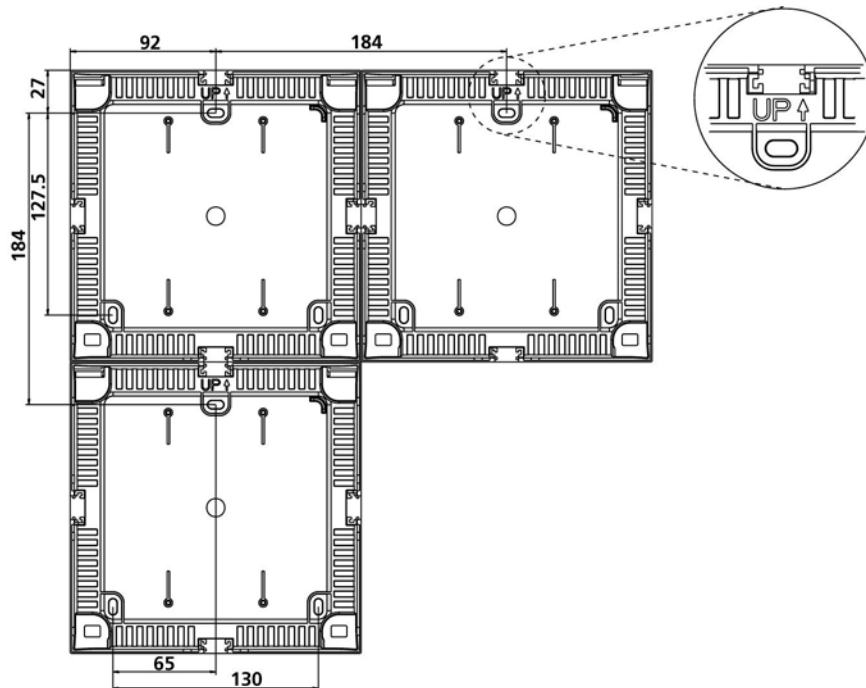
Mounting dimension is in mm. The modules should be mounted with the marking text, "UP", upwards.
